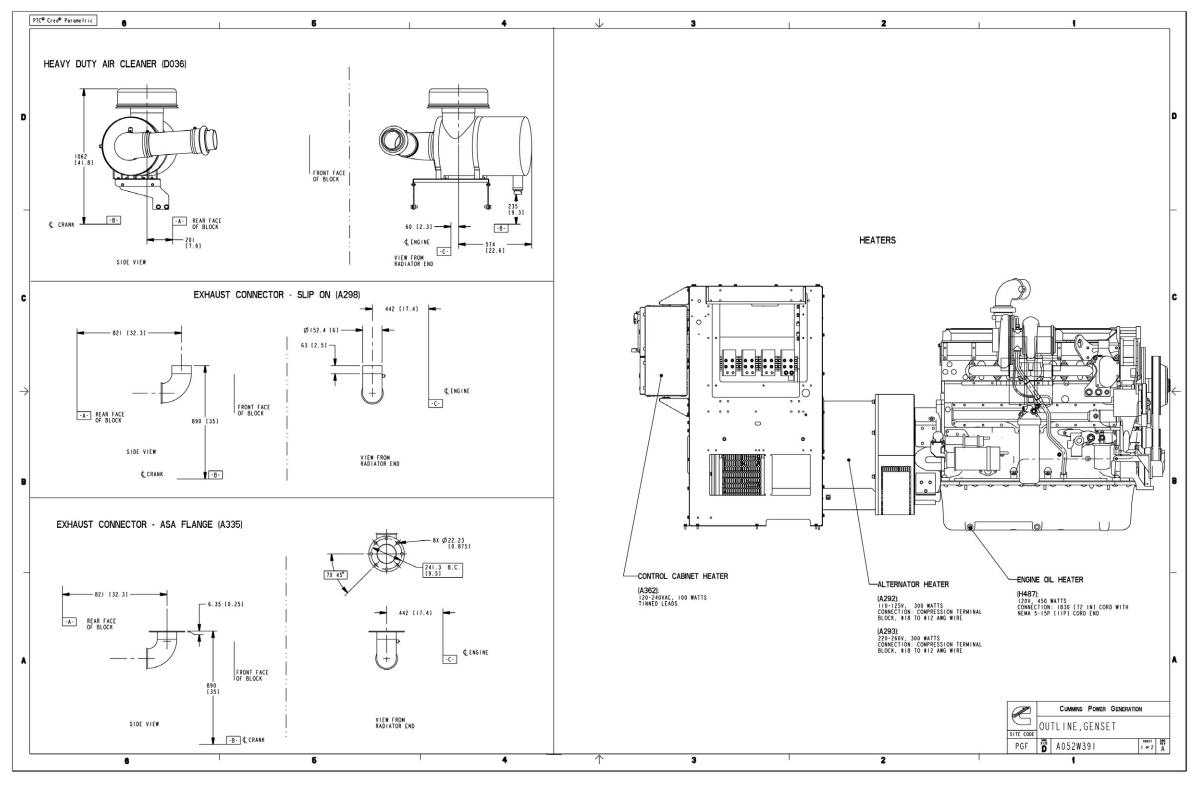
OUTLINE DRAWING - EXHAUST CONNECTOR, AIR CLEANER
